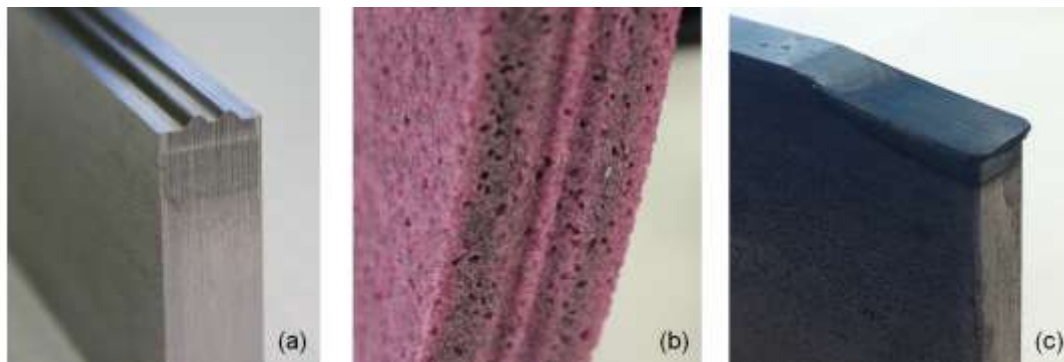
(a) A typical profiled workpiece, (b) tool wear on a profiled wheel, and (c) workpiece damage.
